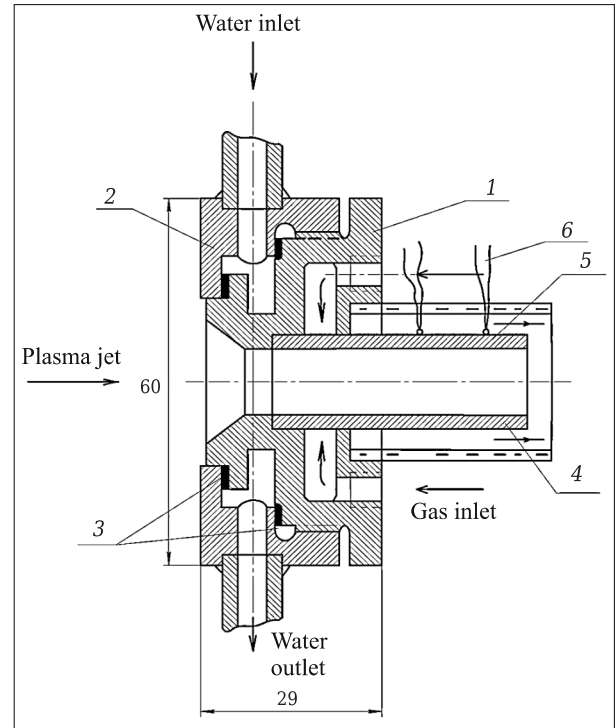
Assembly for thermal stability testing of the samples: 1) housing; 2) cover; 3) rubber gaskets; 4) quartz glass; 5) test sample; 6) thermocouples.
